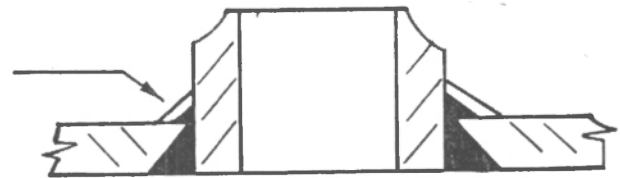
Actual example of poor supervision. Drawing called for $\frac{3}{8}$ " fillet. Some of the welds were as much as 1".
